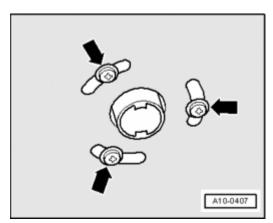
Removing Bolts For Holding Plate For Solenoid Valves Courtesy of VOLKSWAGEN UNITED STATES, INC.
